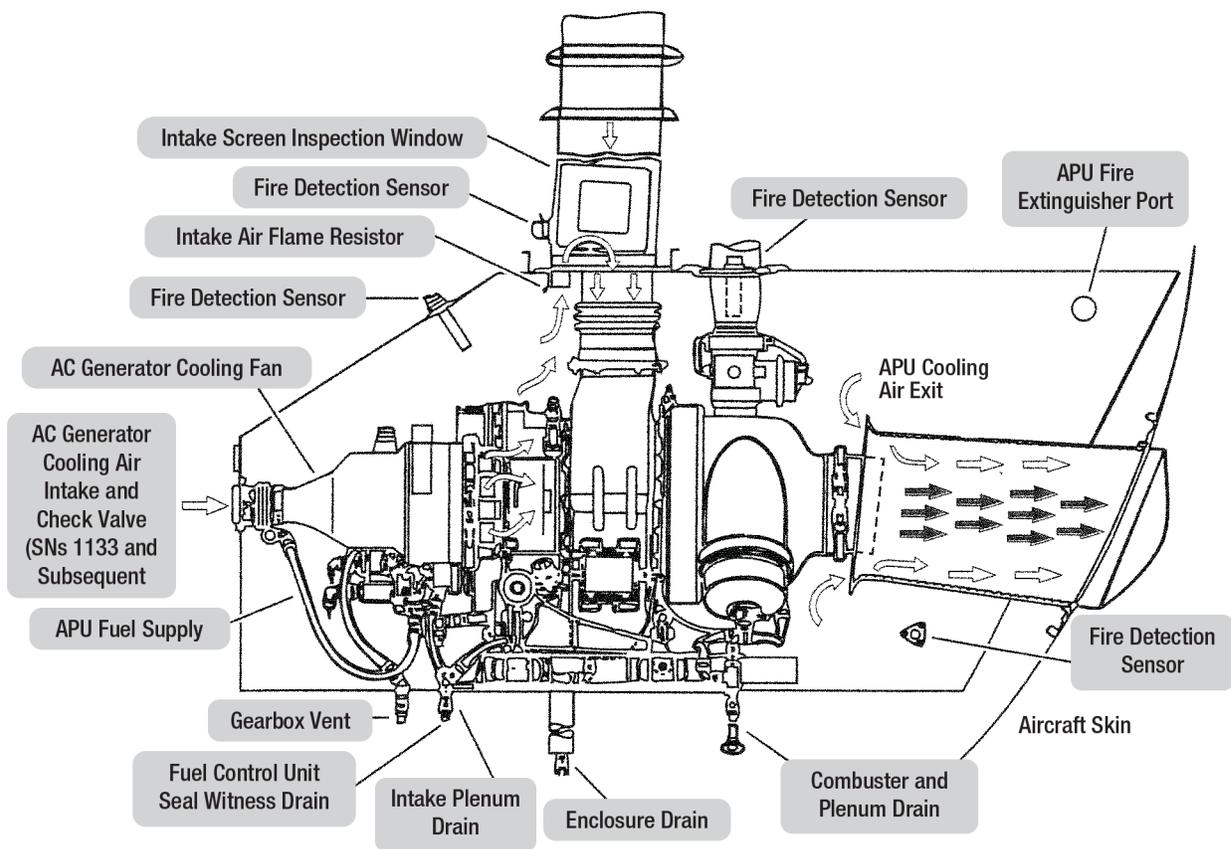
Typical empennage imbedded APU installation with enclosure.
